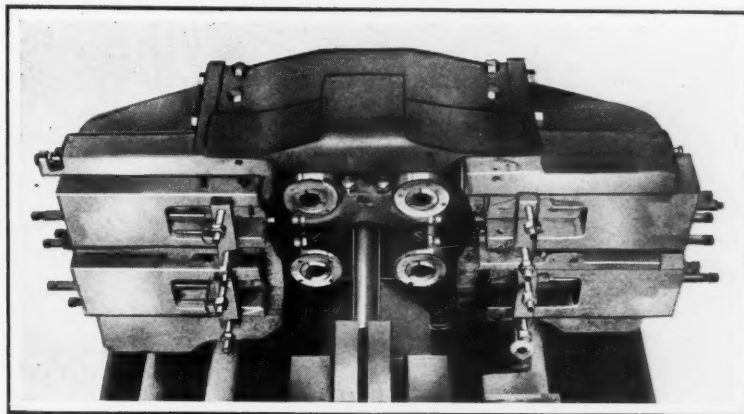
Close-up View of the Four Forming Slides which have Independent Feeds
